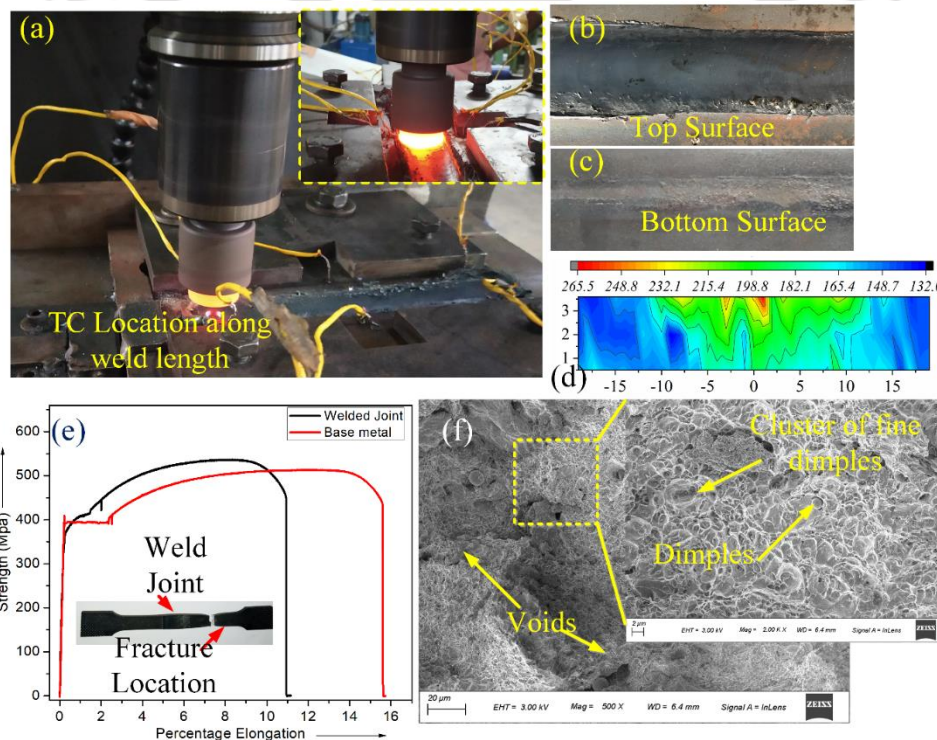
(a) Welding of DH36 plates with tungsten carbide tool for case 1, (b) top surface appearance of welded plate, (c) bottom surface appearance, (d) vickers microhardness profile at 500 gF along the transverse cross-section, (e) tensile properties of the welded specimen, and (f) fracture surface of tensile specimen indicating a cluster of fine dimples
